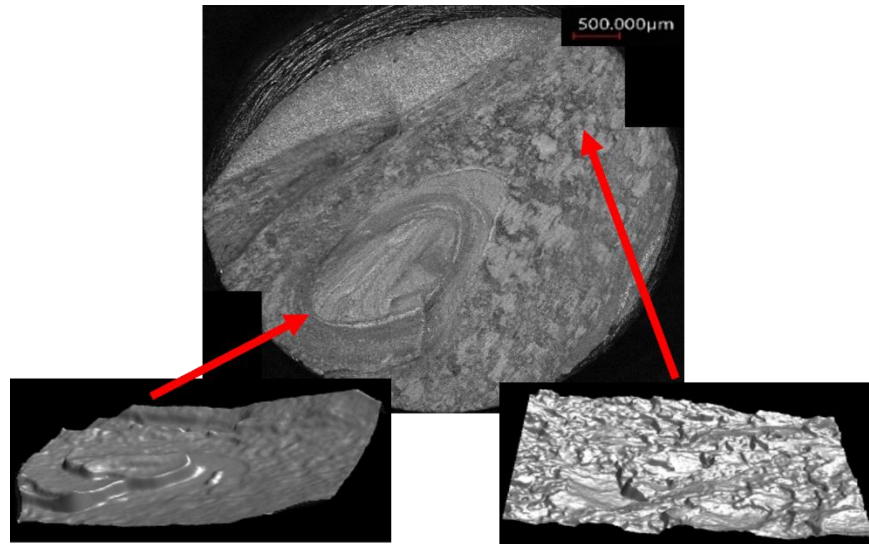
The fracture surface had two distinct zones the ductile ‘twist’ (left) and the granular appearance (right).
